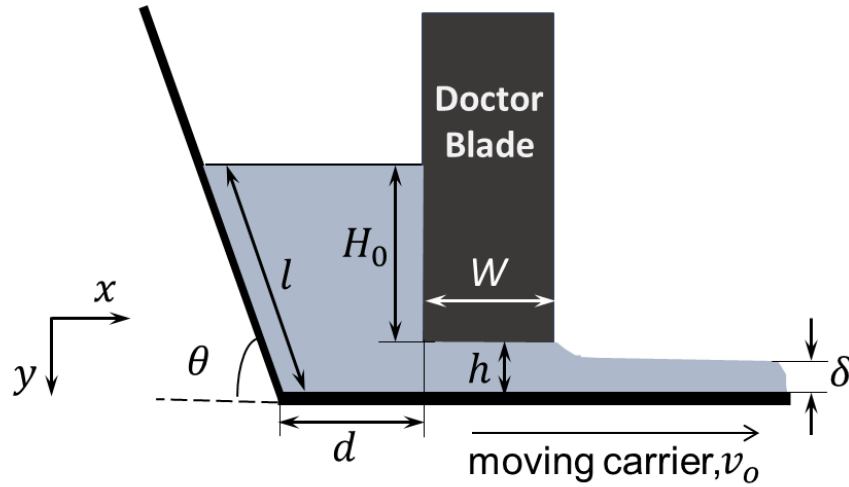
Schematic geometry of the casting head and main tape casting parameters.
